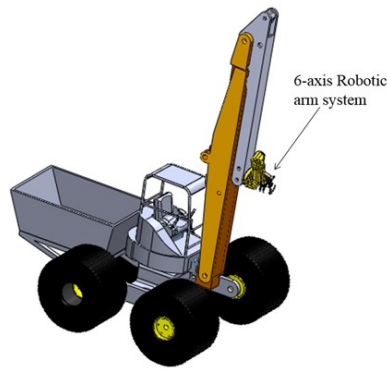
Harvesting machine design with a six-axis robotic arm system.
